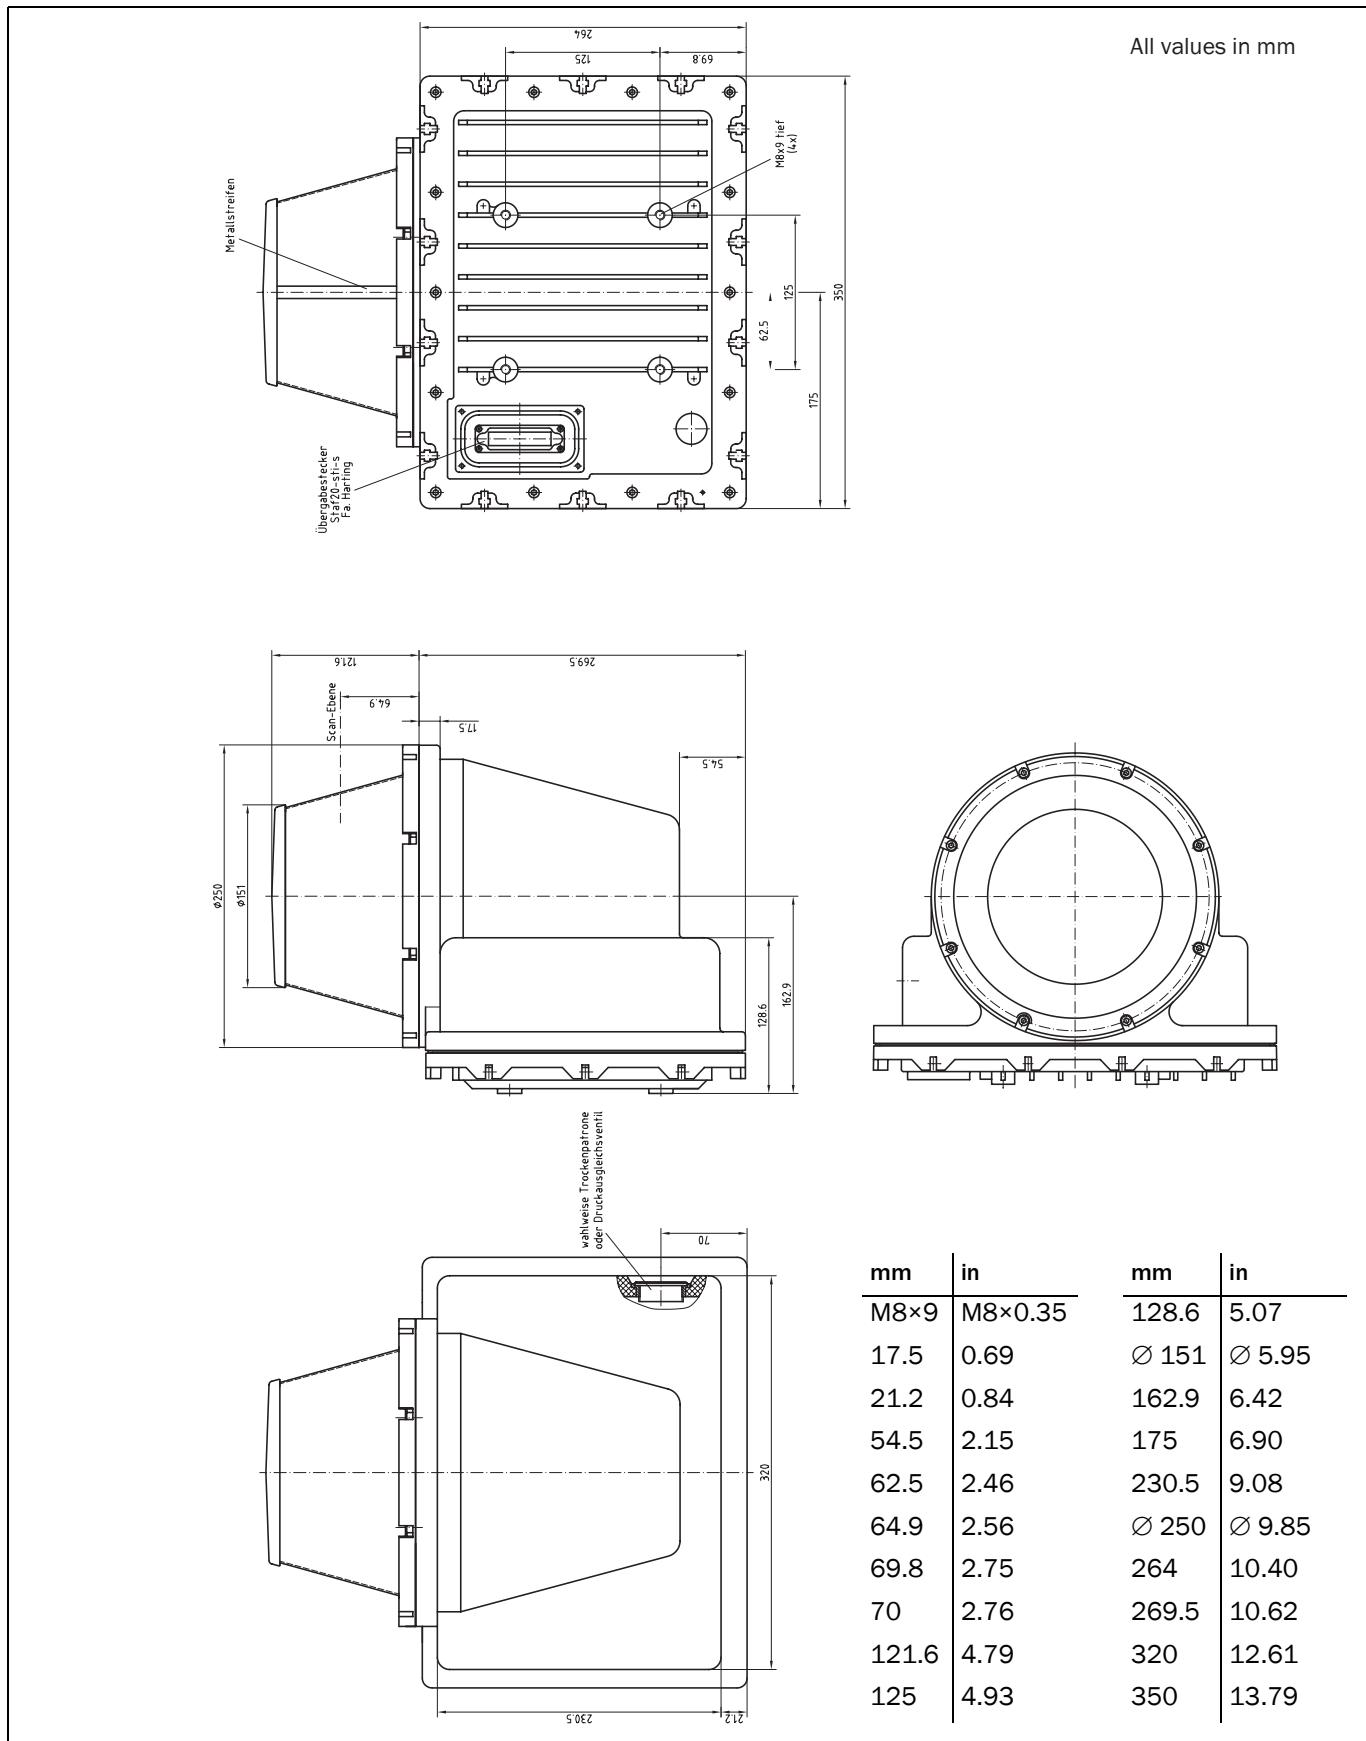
Dimensional drawing LD-LRS2100, 3100, 4100 and 5100
